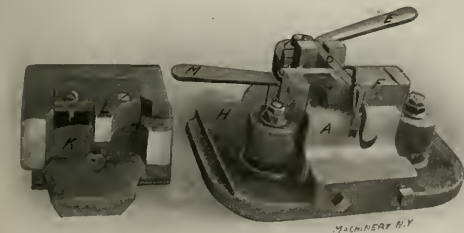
Bending Attachment with Removable Die. Operation Completed.
